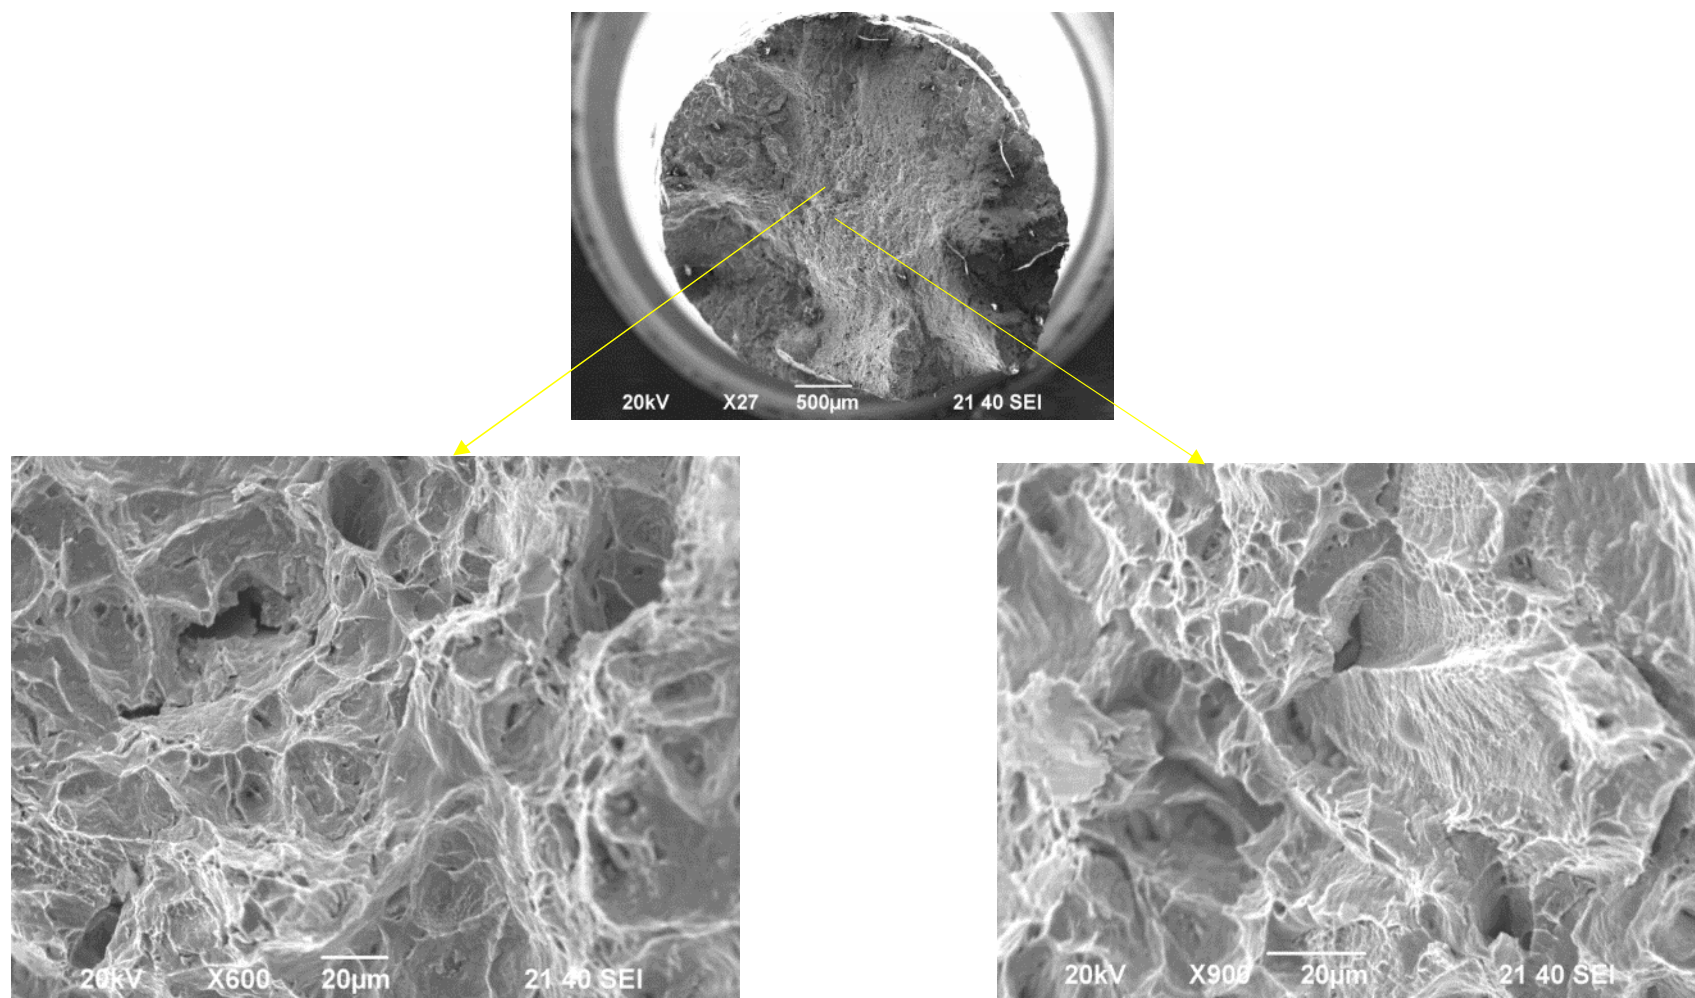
Low magnification image and fracture section micrographs. Left: flange body, 1 mA (F1B28). Right: flange body, 3 mA (F1B25).
